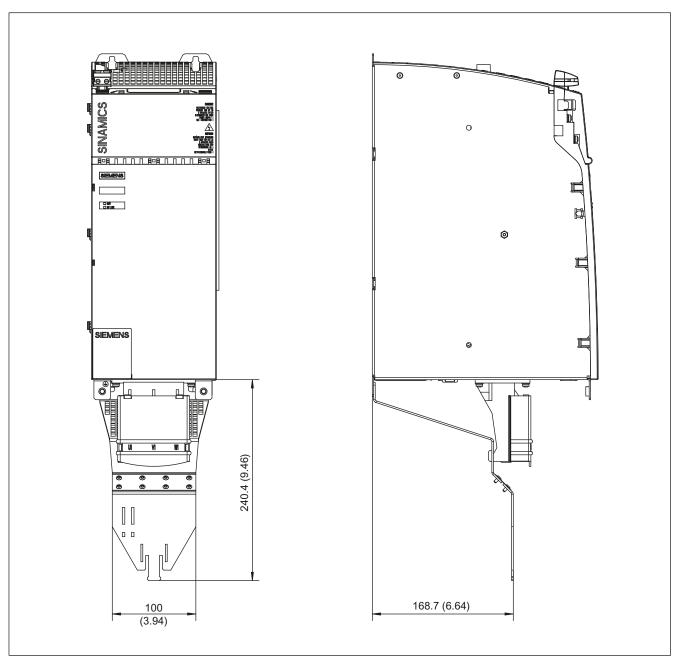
Dimension drawing of shield connecting plate on a 150 mm component with internal air cooling, all dimensions in mm and (inches)
